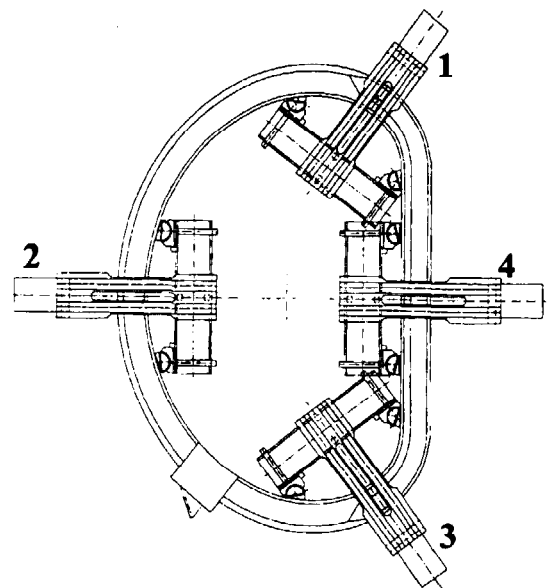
Positions of testing machine. The machine applies a central load which is reacted on either side.
